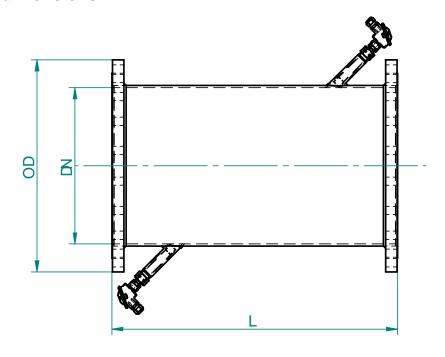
Dimensional sketch of the meter sensor UC7.0
